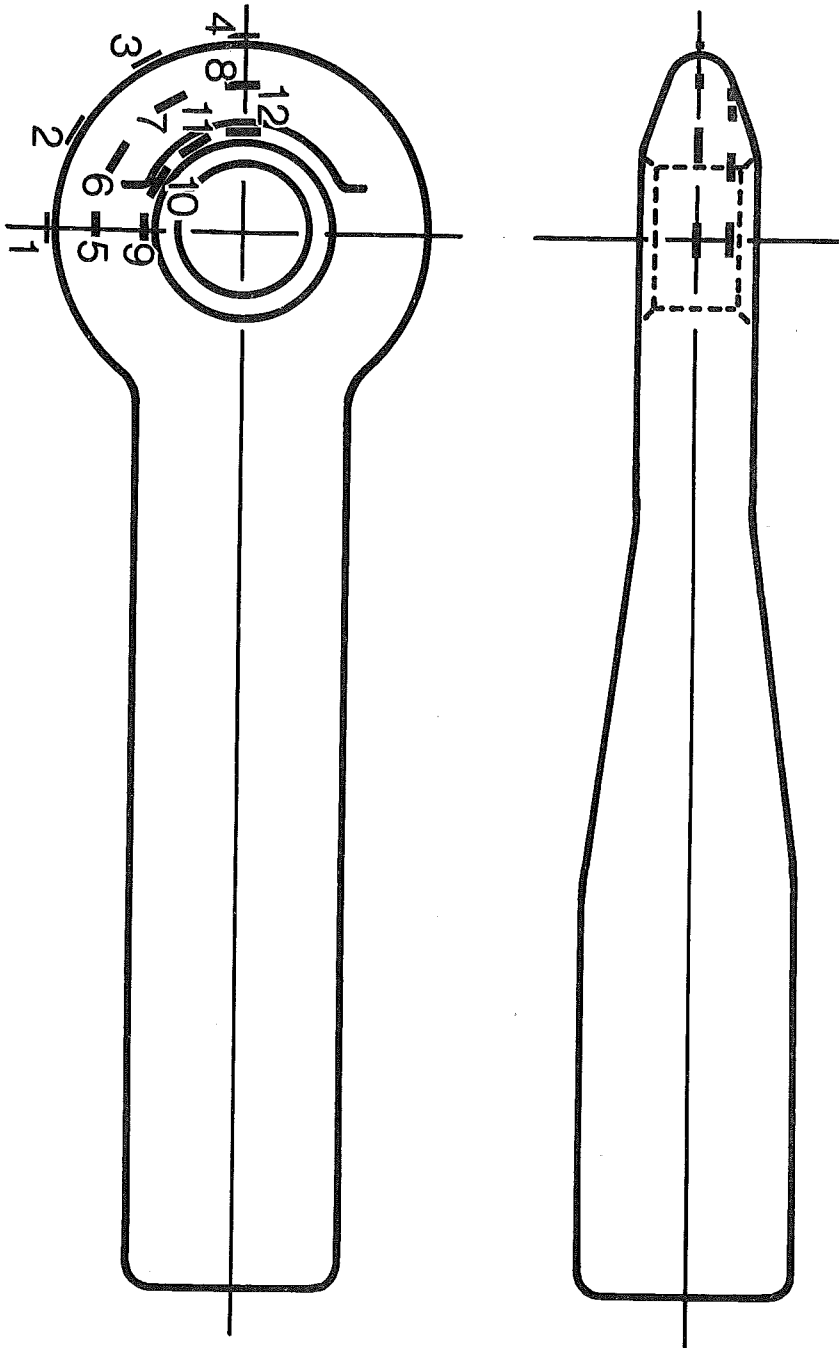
Strain gauge layout used in laboratory testing of a 40 mm hitch eye.
